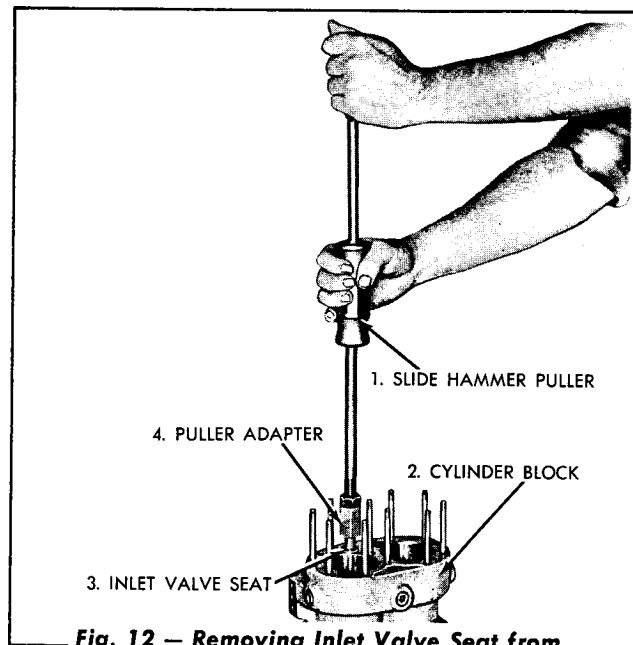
Removing Inlet Valve Seat from Cylinder Block
